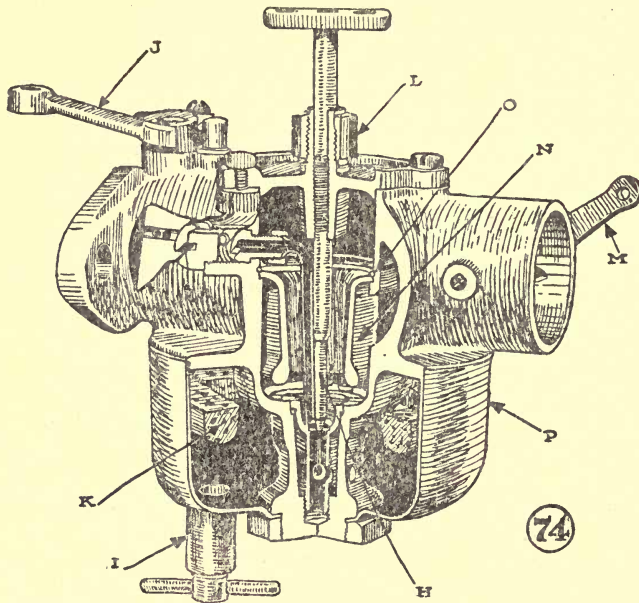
Section of Holley Model G carburetor. H is needle valve, I drain cock, J throttle lever, K float, L needle valve locknut, M choke throttle lever, N choke tube, O locking ring and P bowl
